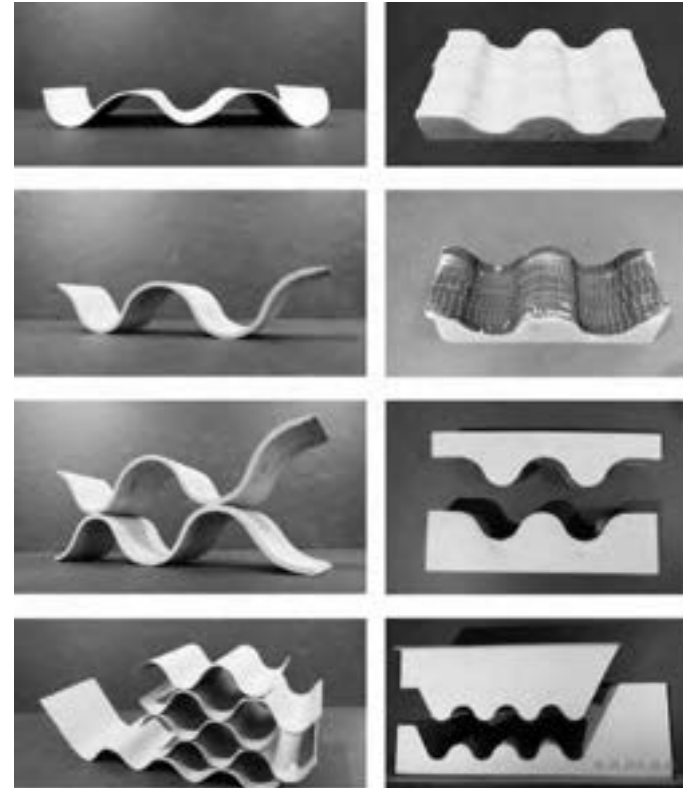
Design and material testing iterations. On the left are the molded objects and on the right are the molds. Testing included foam molds and initial foam core concept model, open molds and plywood material tests, closed molds and connection testing, molded chipboard and full size mockup molds. Photographs provided by Mollie Matthews.
